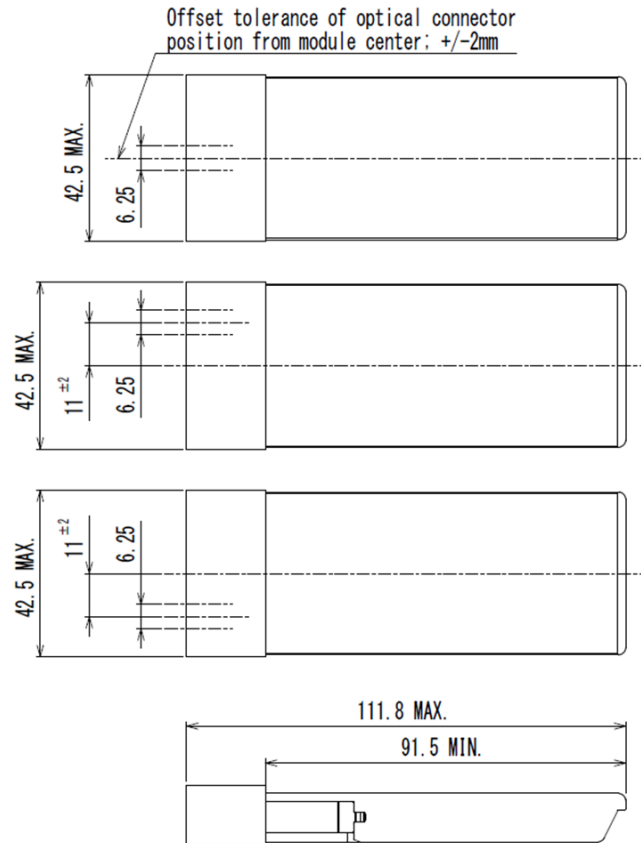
CFP2-ACO Allowed Connector Positions (Centered, Left Justified, and Right Justified) with Dimensional Tolerances.
